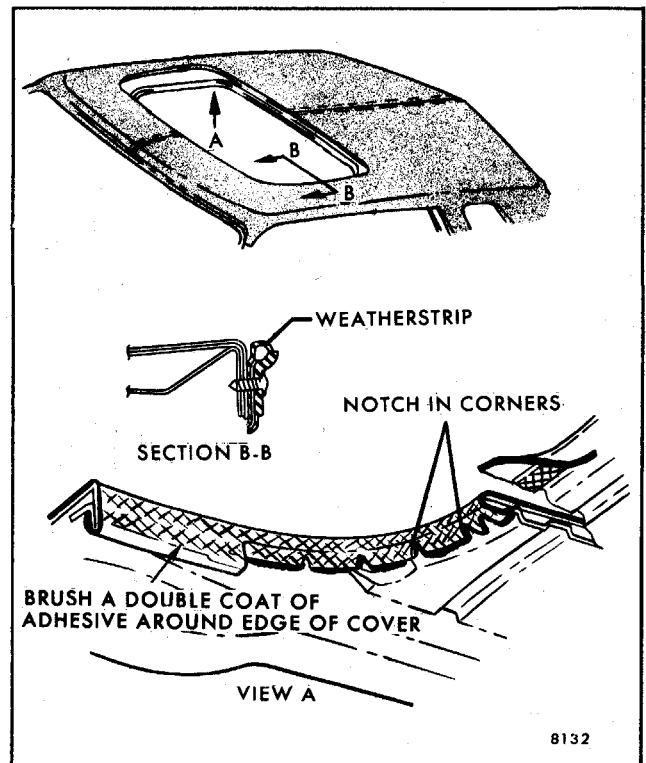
Fabric Roof Cover Installation - Sun Roof Option
